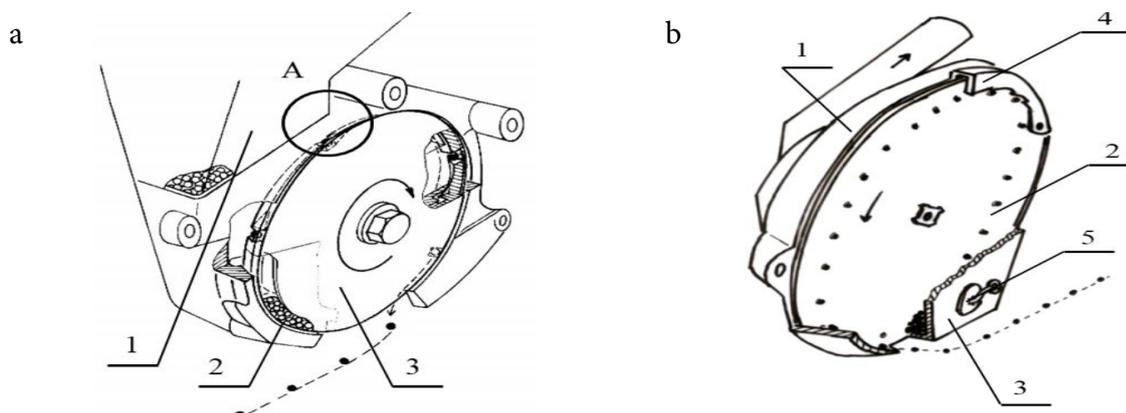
Detail from the mechanical planting mechanism (Findura and Košičiarová, 2020) (a): 1 – bin for seeds, 2 – filling chamber, 3 – planting disc, A – disc picking hole. Detail of the pneumatic planting mechanism (b): 1 – vacuum chamber, 2 – planting disc, 3 – filling chamber with seeds, 4 – wiper, 5 – seed outlet.
